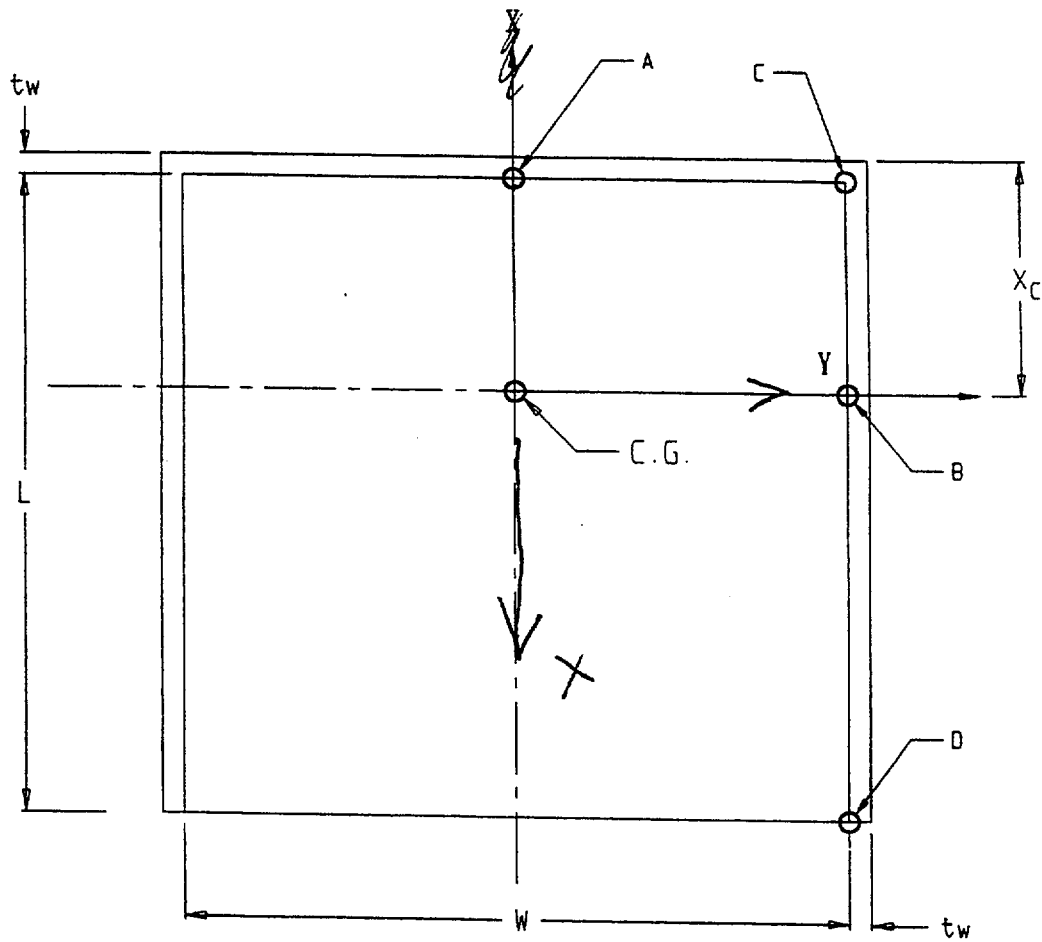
R.1; WELD GROUP GEOMETRY
